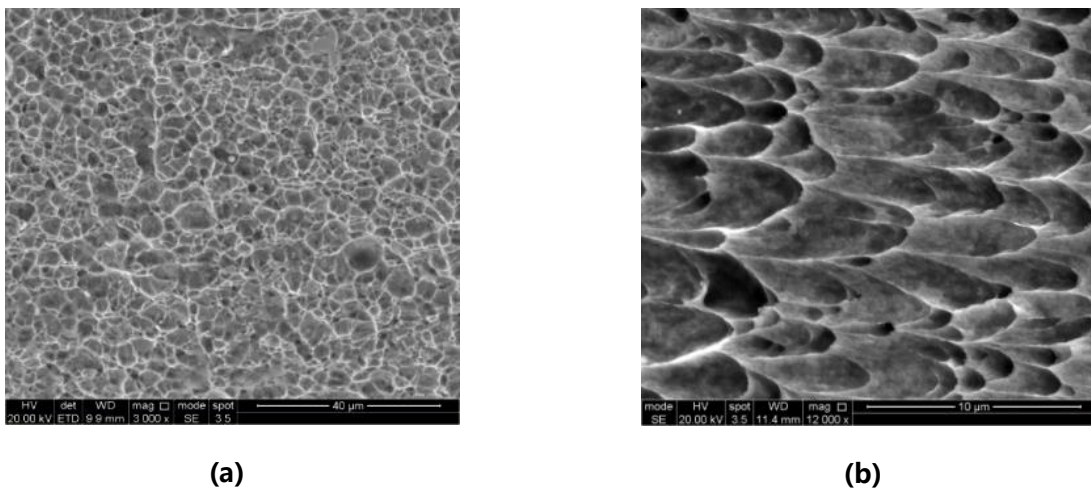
(a) Microvoids observed in ductile fracture surface resulted by tension in welds of DP1000, (b) elongated dimples observed in shear fracture surface in welds of DP1000.
